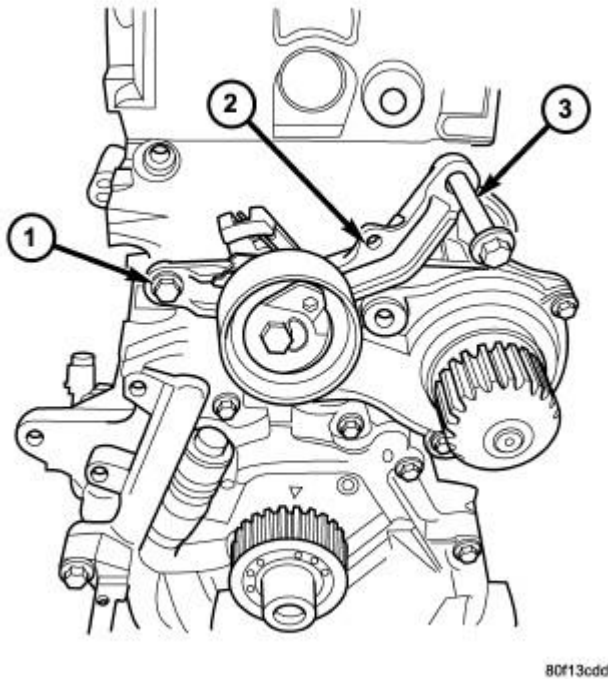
Timing Belt Tensioner/Bracket Assembly
